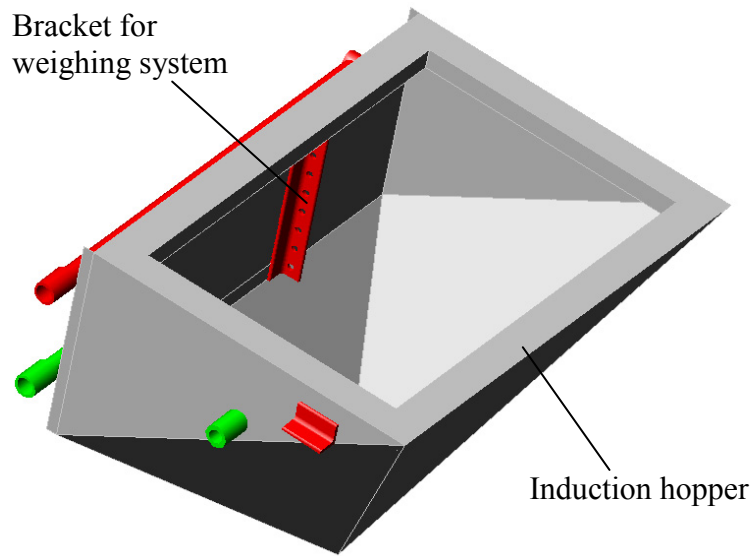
3D CAD outline of the construction of the weighing system
